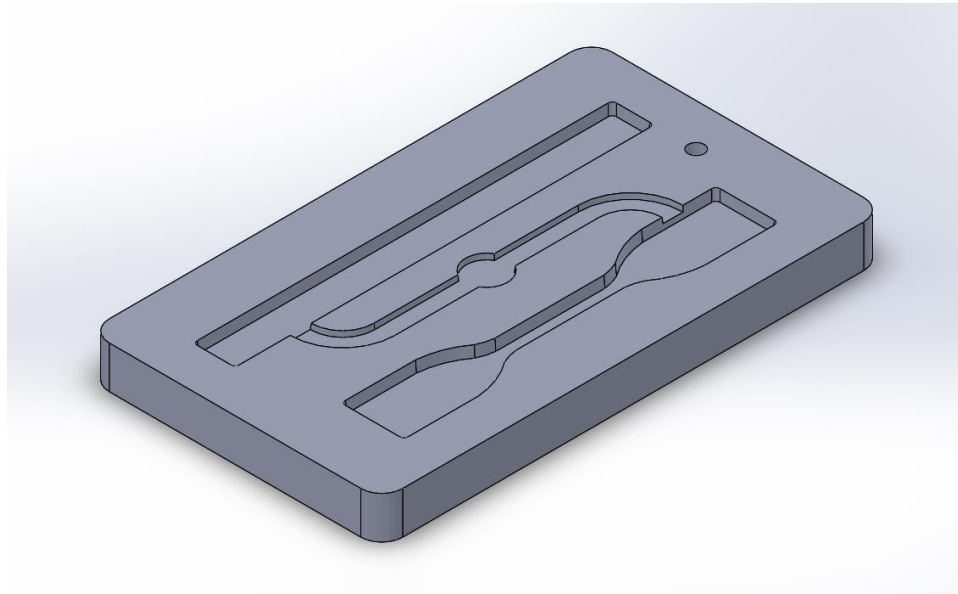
Mold Insert Solidworks™ design. Flexure and tensile specimens in one mold
